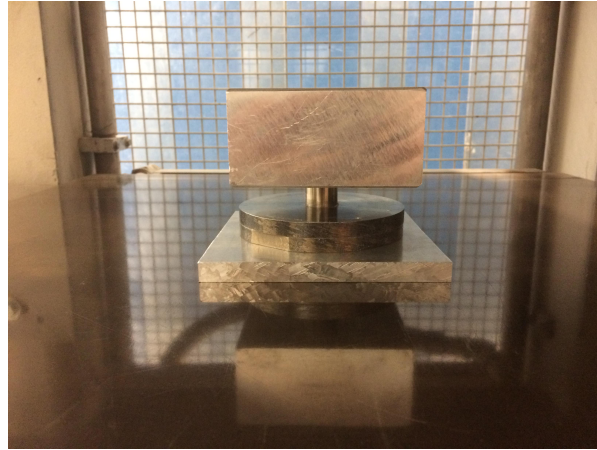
Setup of the mold on the lower Joos press plate before closure
